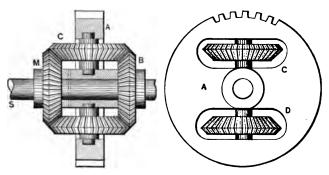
COMPENSATING BEVEL GEAR TRAIN.
